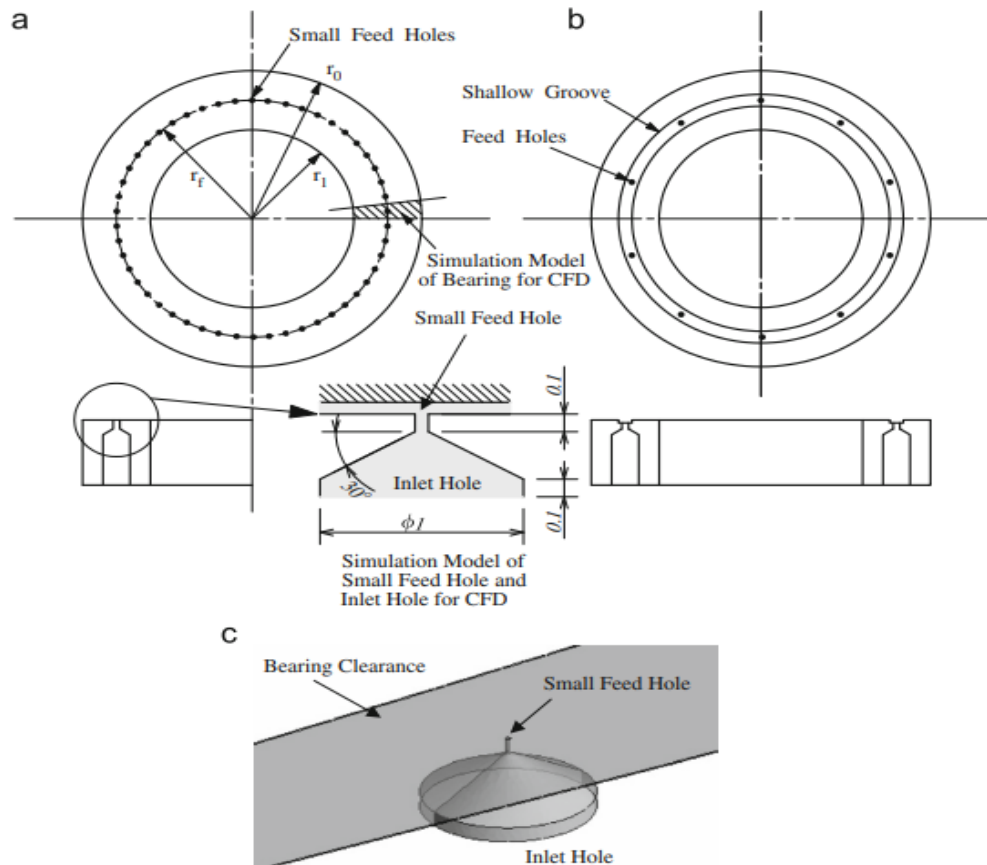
Aerostatic thrust bearings treated in this paper [unit: mm]. (a) Bearing with small feed holes, (b) Bearing with compound restrictors and (c) Three-dimensional view of the simulation model.
